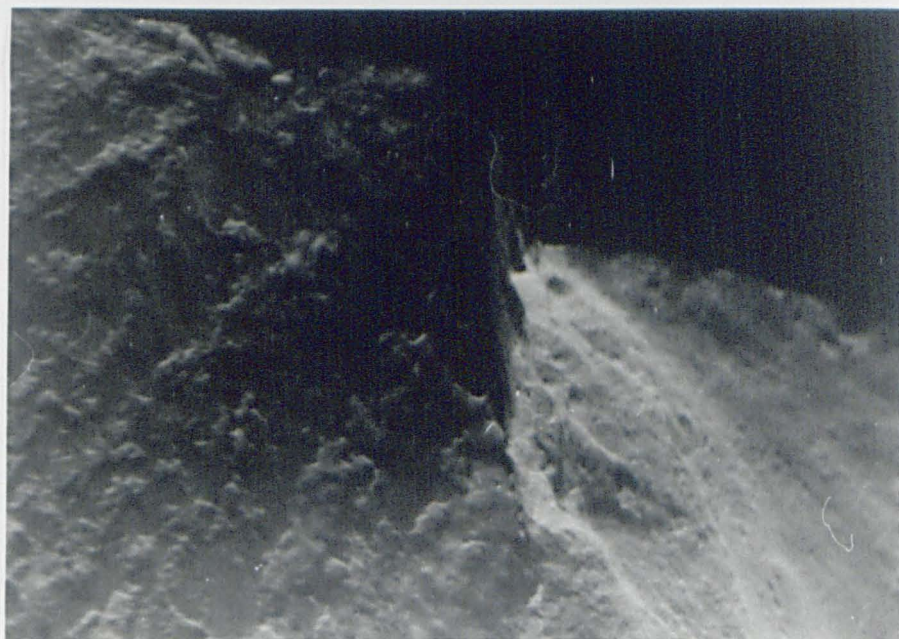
Fracture surfaces of corrosion fatigue test specimens;
